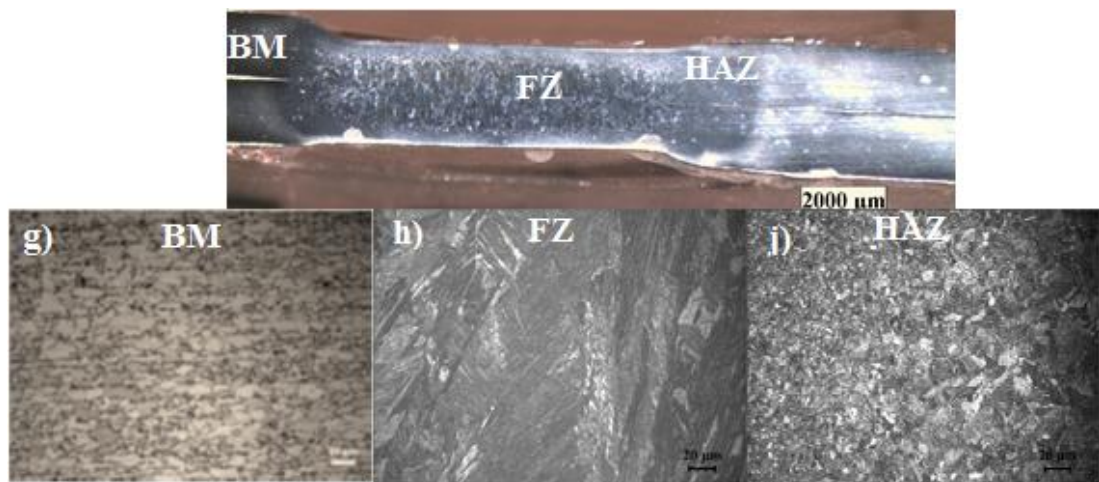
The weld zone profile and its microstructures of DP600 weldment joined with 5.5 Bar electrode force with 4kA welding current. g) DP600 base metal (BM), h) DP600 Heat Affect Zone (HAZ), j) DP600 weld nugget (FZ).
